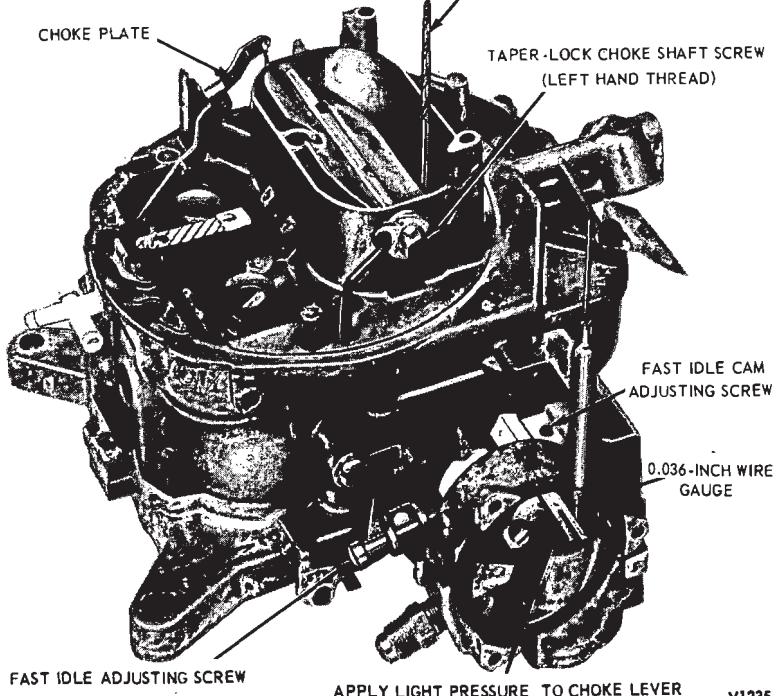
Choke Plate Pull-Down and Fast Idle Cam Adjustment
